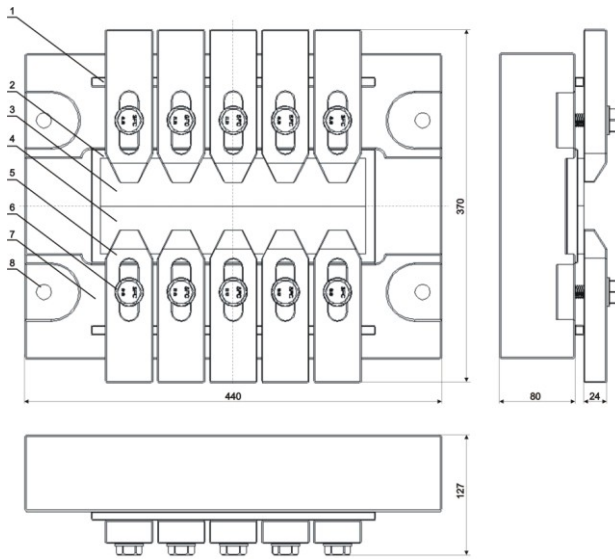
Auxiliary equipment for FSW: 1 - Shim, 2 - Support plate, 3 - Workpiece, 4 - Workpiece, 5 - Workpiece clamp, 6 - Screw, 7 - The base plate, 8 - The place for special carriers of the base plate [3]
